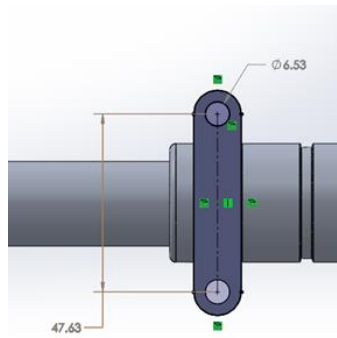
Dimensions of KAZ Tech. Steering Rack mount, Hole Locations and Size
